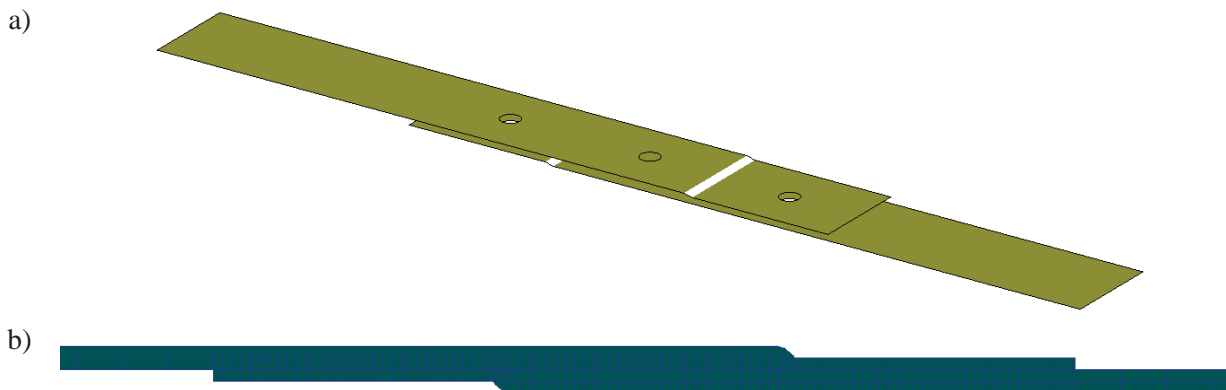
Geometry of the specimen - case c2 a) axonometric view b) plane view
